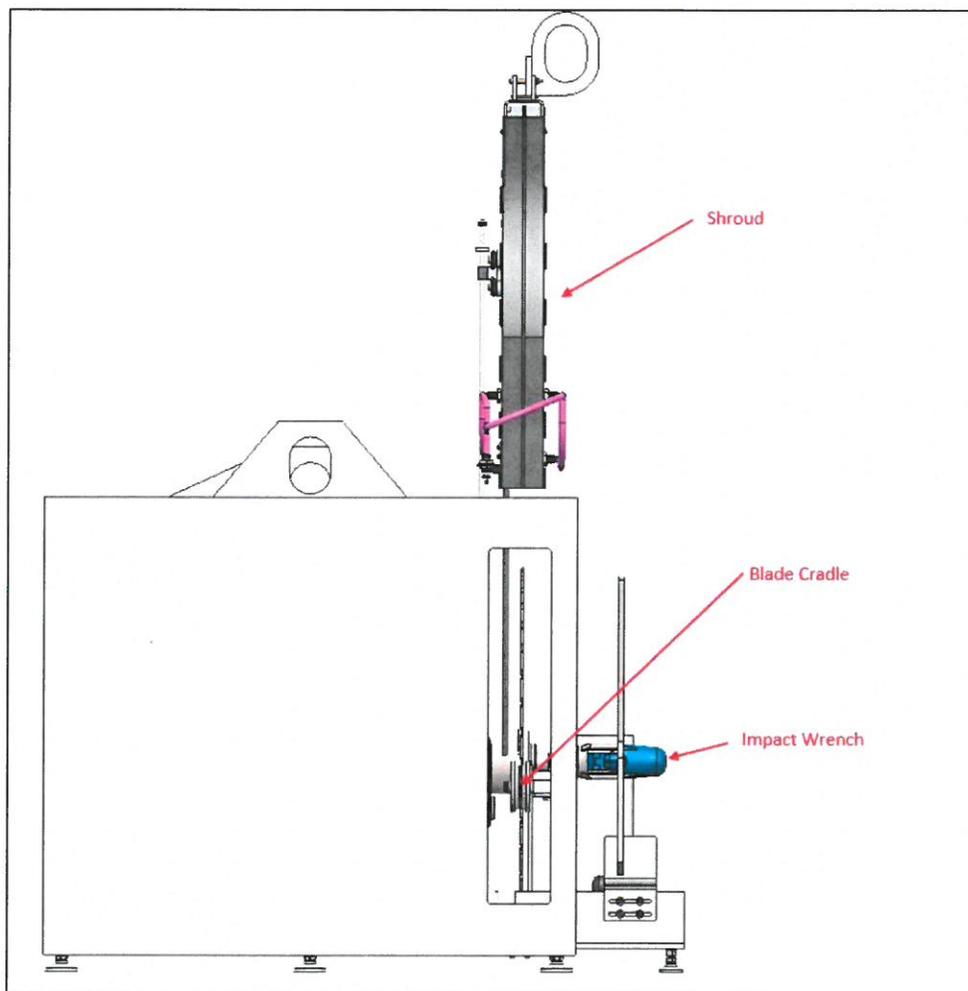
Saw with Blade Change Tool Extended and Engaged with the Saw
